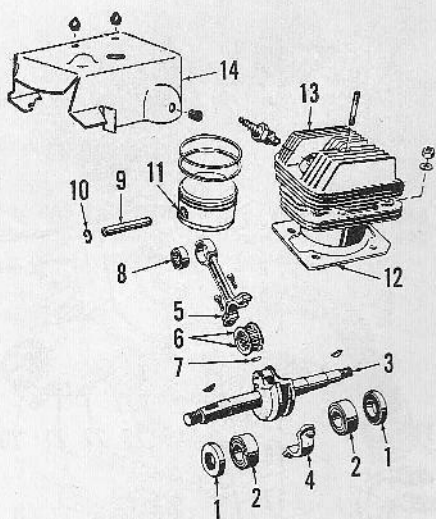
Exploded view showing crankshaft, cylinder and associated parts.
